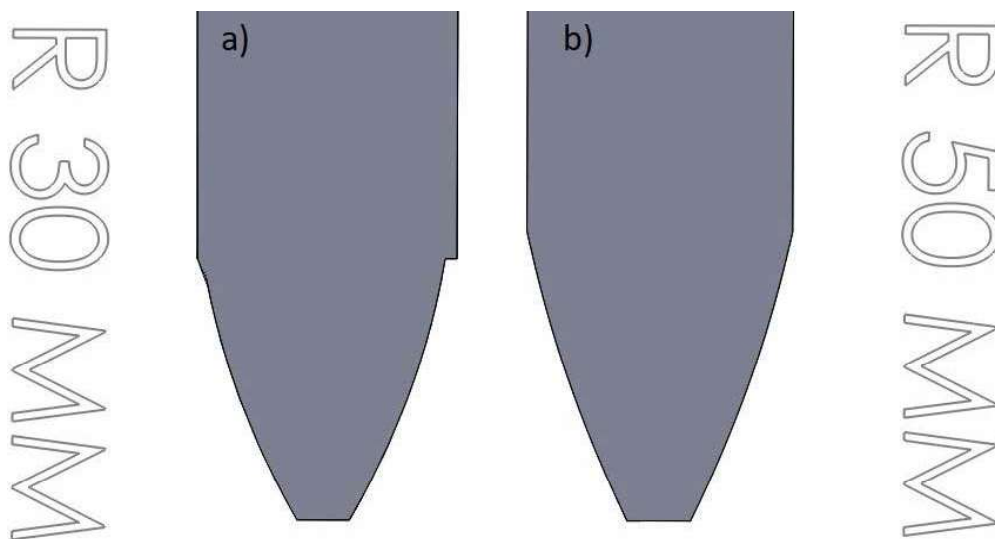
The outline of a grinding wheel for a worm with the concave thread outline and the defined concavity radius: a) $R = 30$ mm, b) $R = 50$ mm
